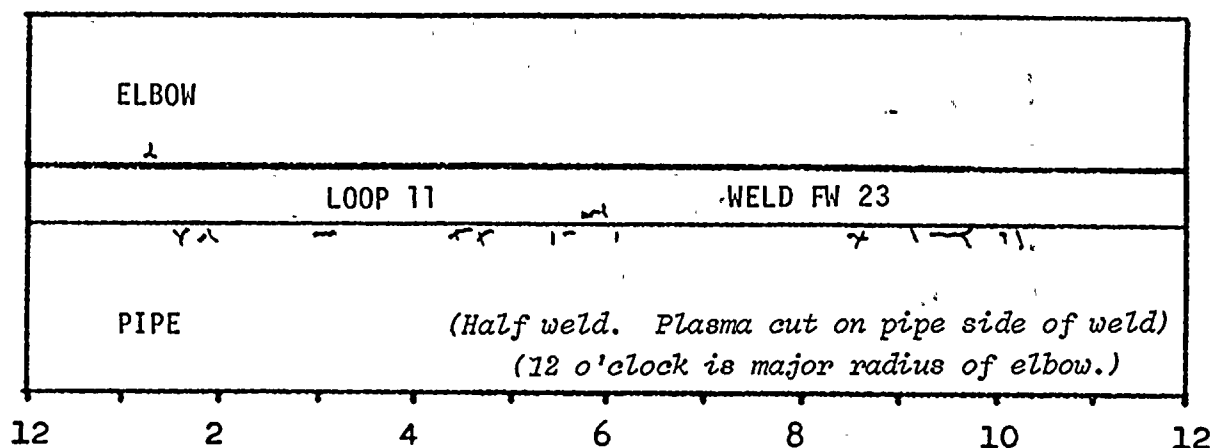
(Continued) Dye Penetrant inspection results, welds of Loop 11. (Refer to Figure 1 for weld locations.)
